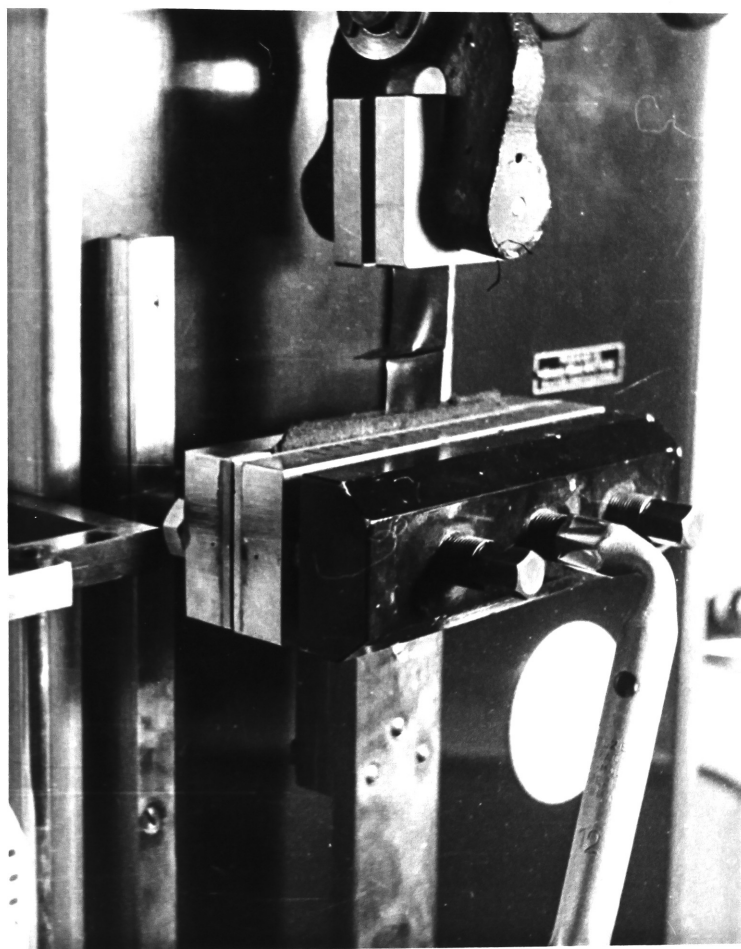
Freycis weld under A.S.T.M. Tension Test.
